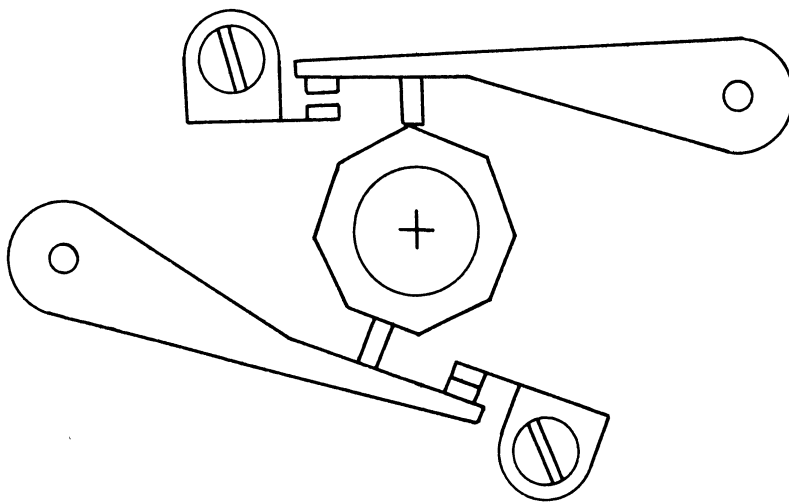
BREAKER POINT ASSEMBLY FOR CD MECHANICAL CONTACT SYSTEM
